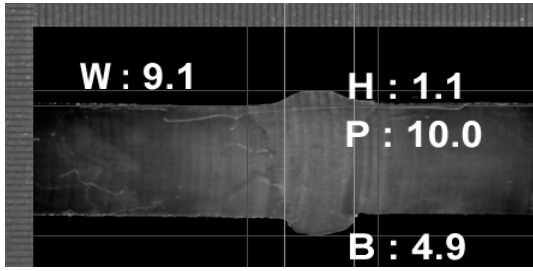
Cross section in the welded part derived optimal welding condition
